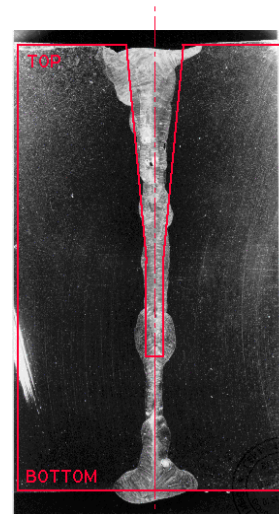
multipass NdYag laser weld in 40 mm thickness.
